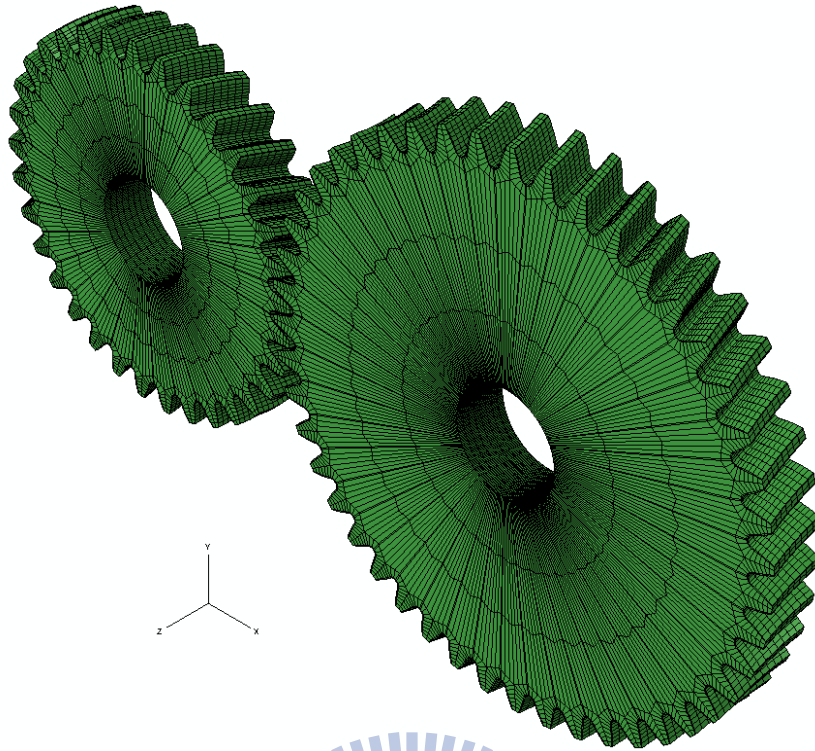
Finite element contact model of a spherical helical gear set with convex pinion and concave gear under parallel axes mounting mode
